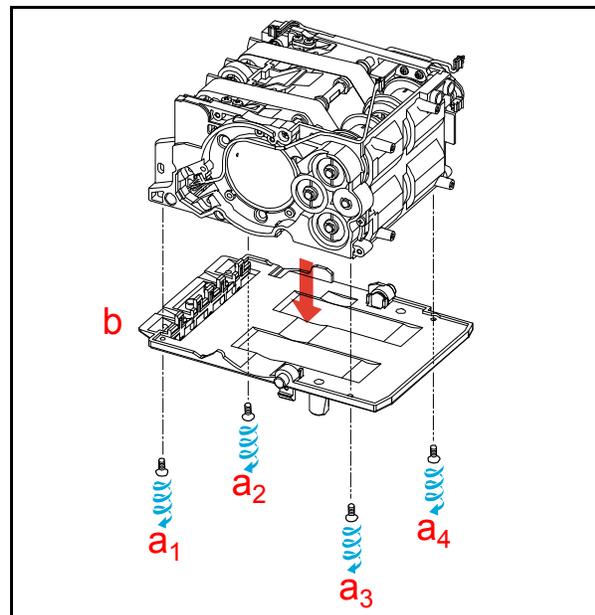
Frame Shaft & Limit Spring Assembly
